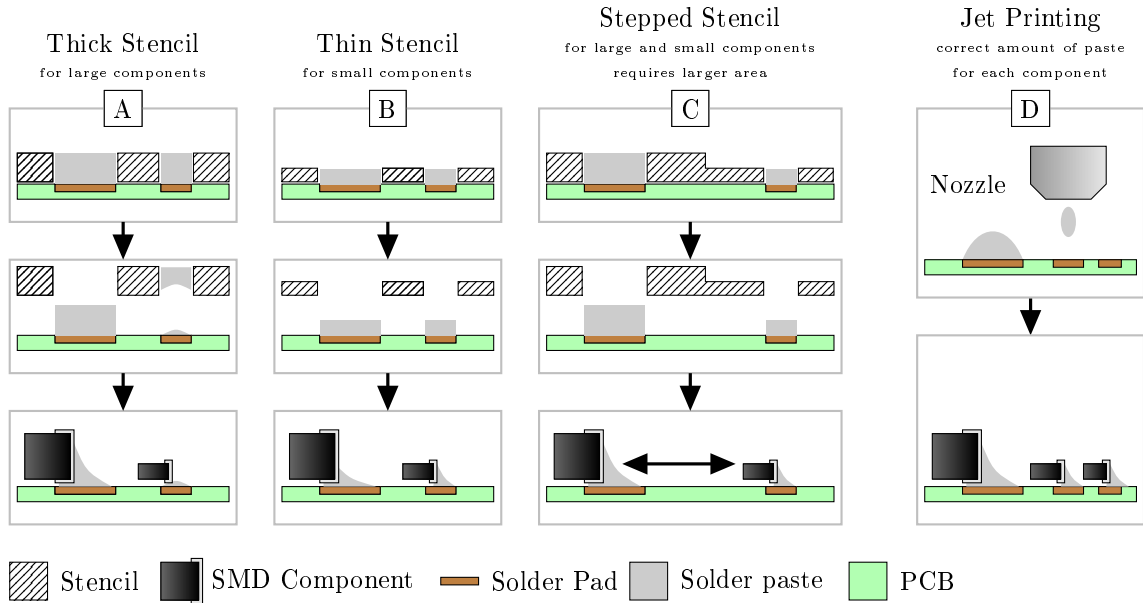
Comparison of stencil and jet printing - Drawbacks of screen printing (use of stencils): A-C top to bottom: Application of solder paste using a stencil; removing the stencil - solder paste should remain on the board; resulting solder joints at electronic components. D: application of solder paste using jet printing.
